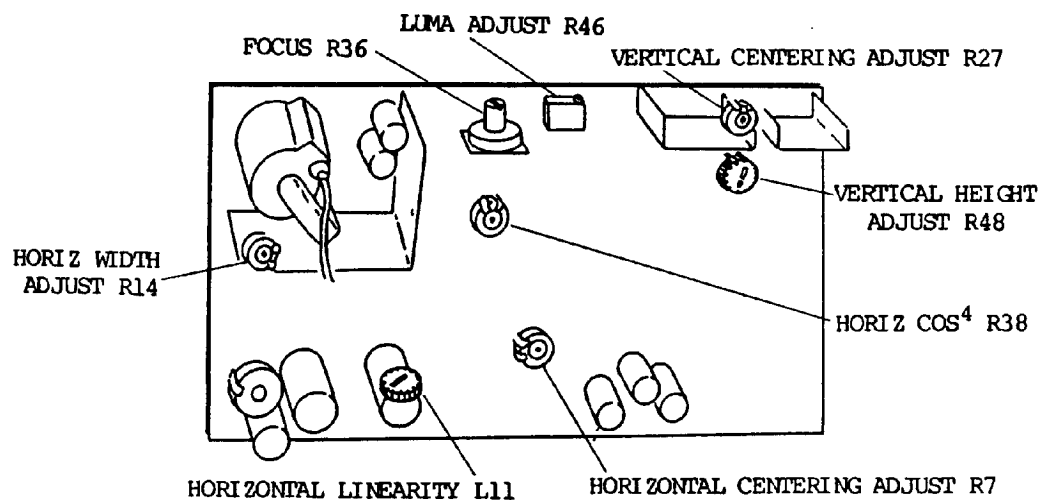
Electrical/Final Assembly Alignment of the CRT
